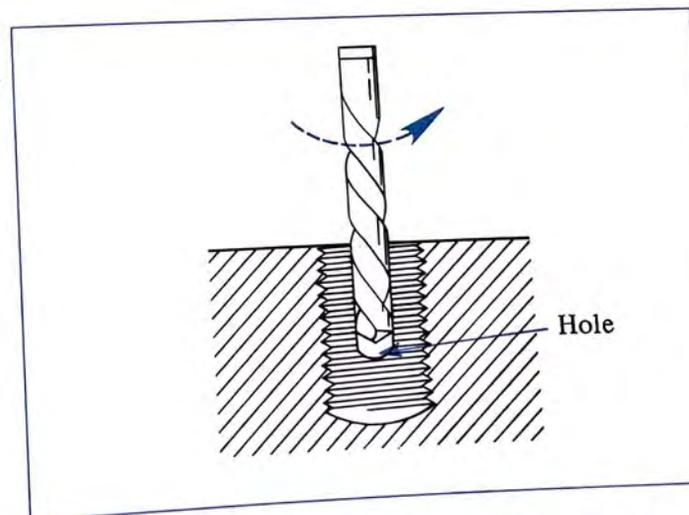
A Screw Extractor Turned into a Pilot Hole Previously Drilled in a Broken Part
